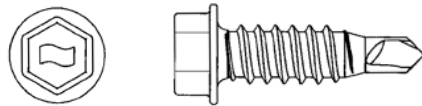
1/4-14 INDENTED HEX WASHER HEAD TYPE 5 SCREW
